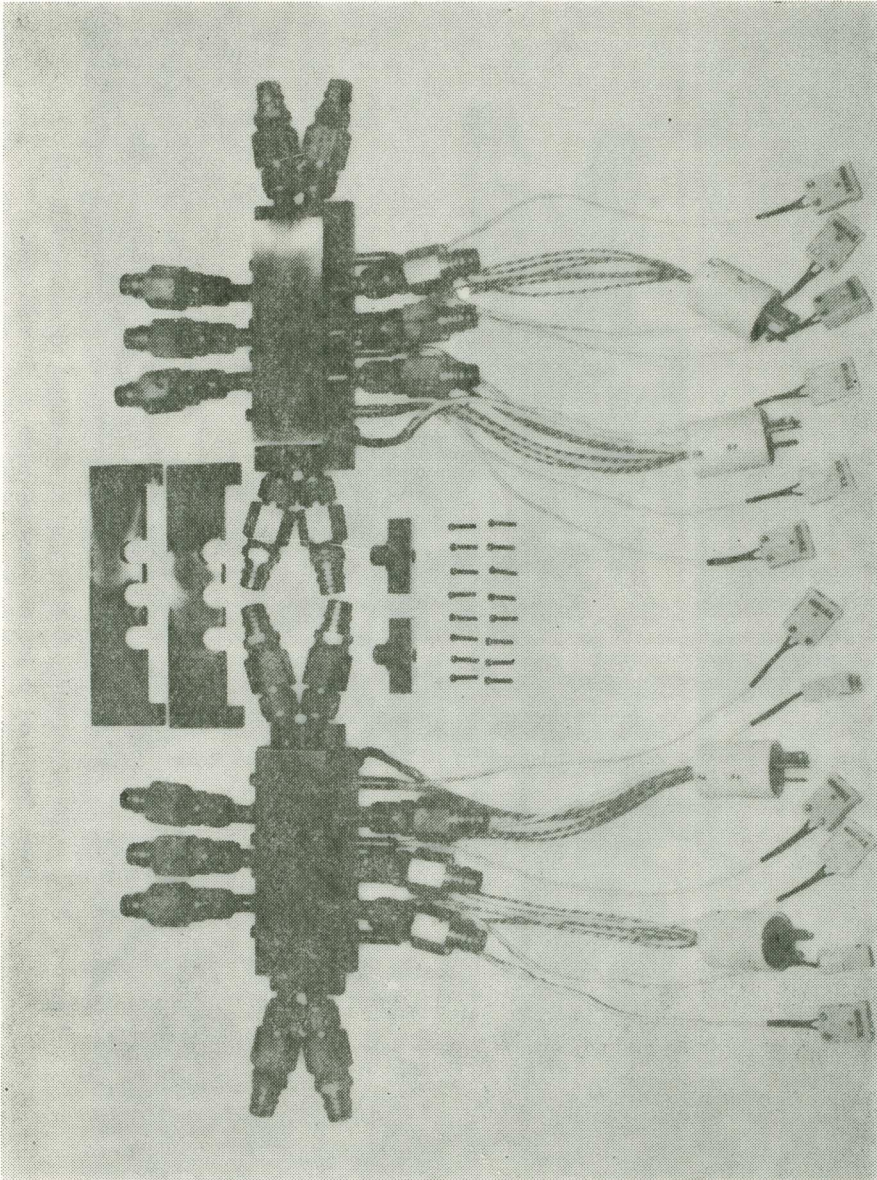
Photograph of the actual match die mold showing all the components, electrical connectors for heaters, and thermocouples and the copper tubes for the water coolant.
